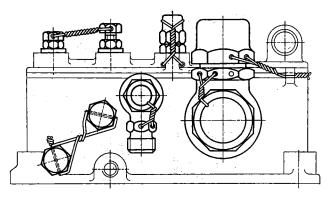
Hydraulic control unit with threaded components locked by wiring
